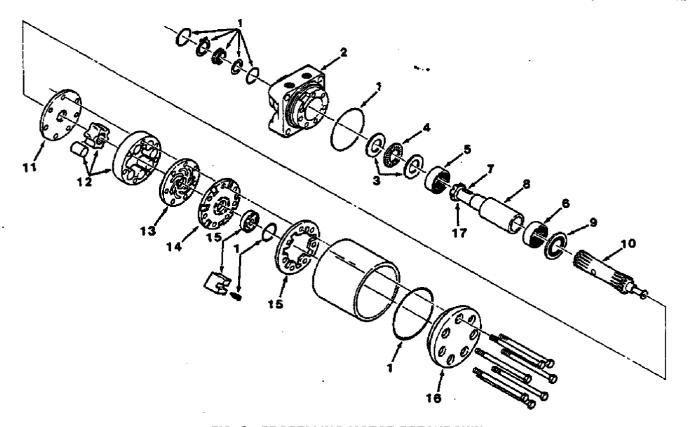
PROPELLING MOTOR BREAKDOWN
